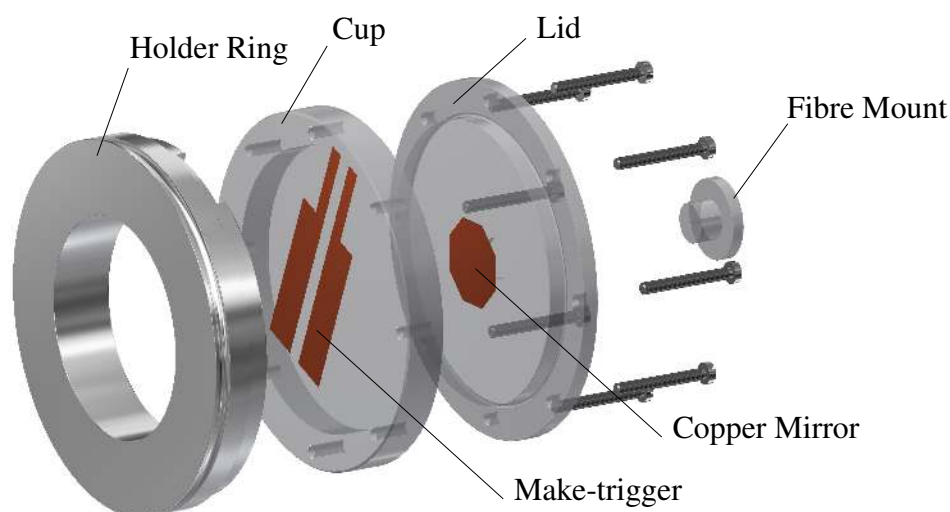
Expanded diagram of the sample cell. The holder ring has threaded holes for the bolts. The whole assembly is sealed with epoxy resin, and the fibre mount is glued in place.
